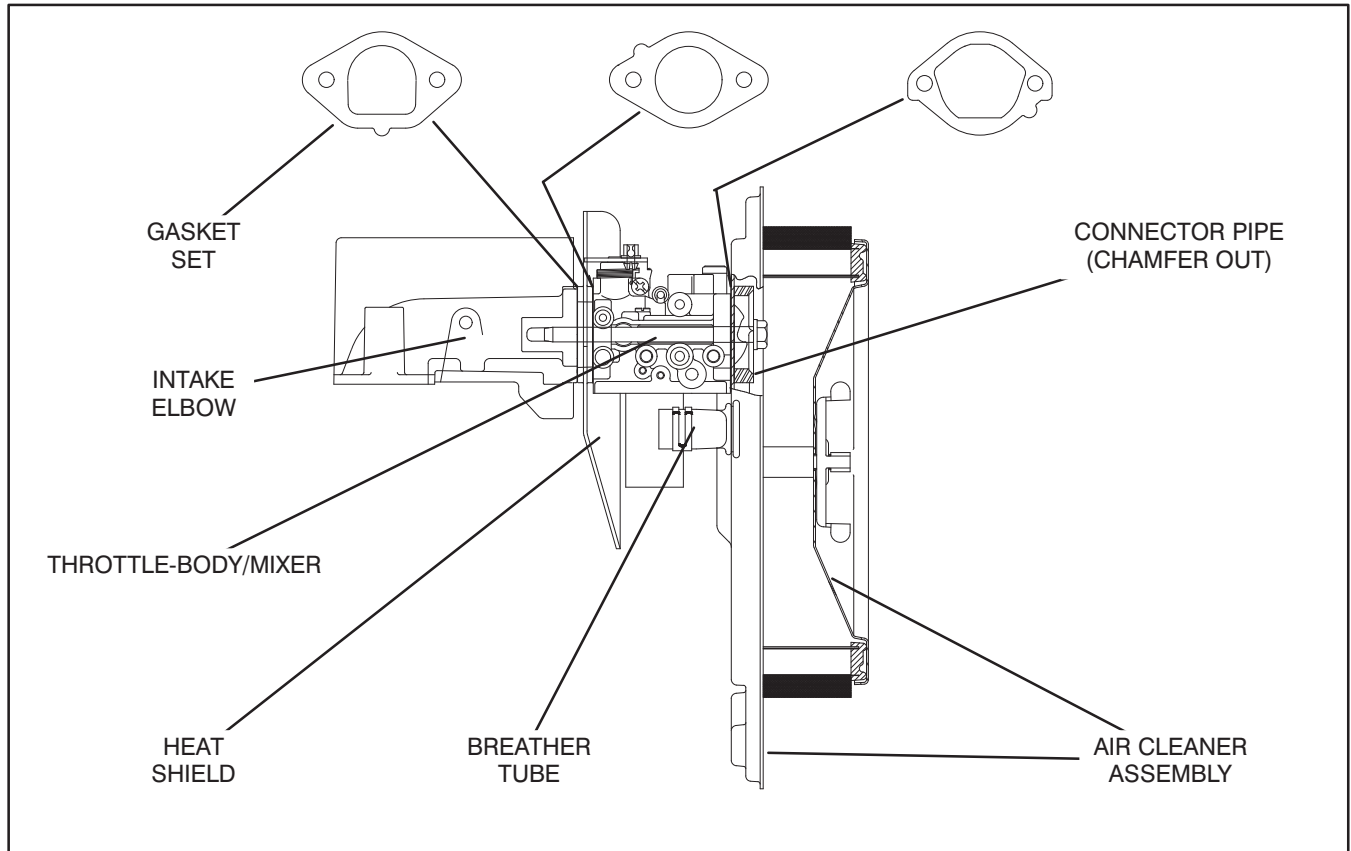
THROTTLE-BODY/MIXER ASSEMBLY
